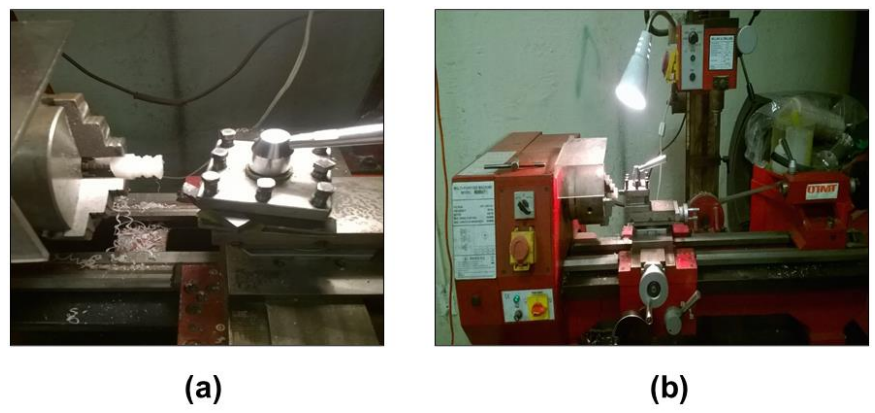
Photographs of the milling machine (a) and lathe machine (b), been used while the fabrication of the fluidization column in the Prototype Workshop of the Research Center.
